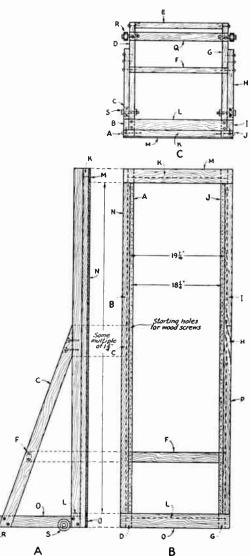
Detail drawing of a standard rack made of wood, Λ — Side view, B — Front view, C — Top view,
